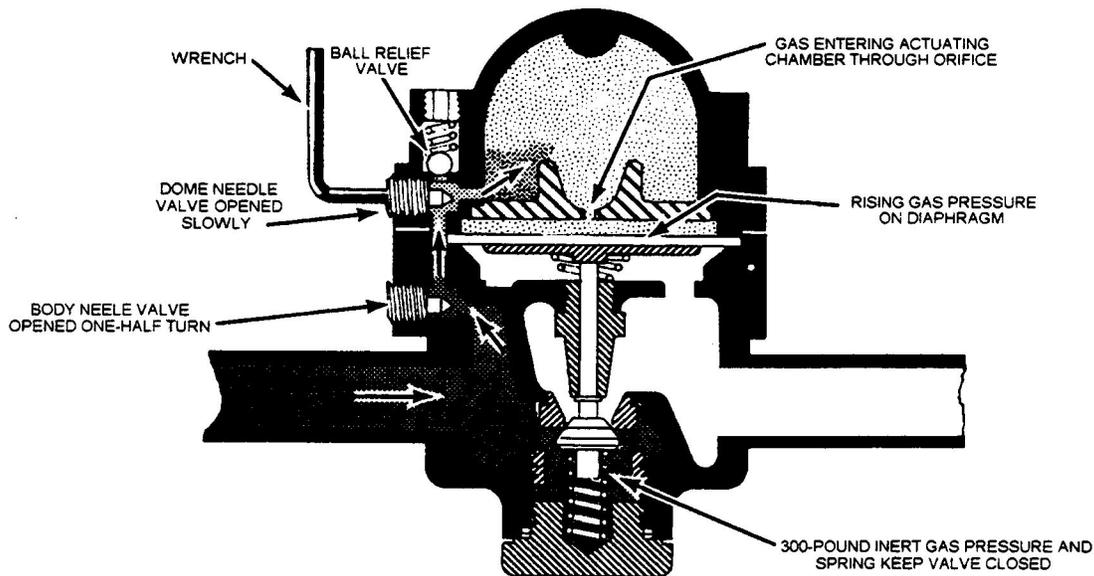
Adjusting the inert-gas-pressure regulating valve.
